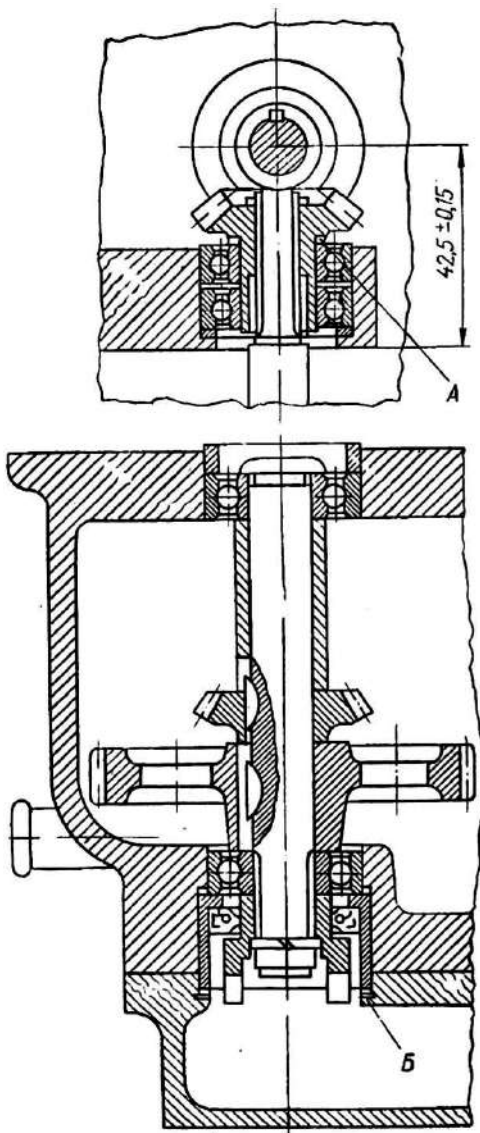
Installation diagram of pump drive of hydraulic system of gearbox of T-150K tractor:
